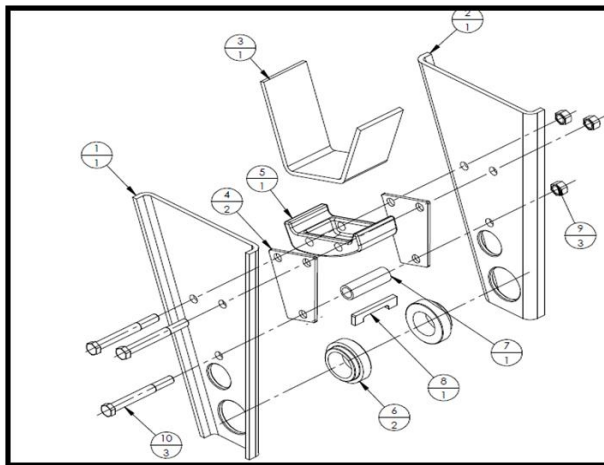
Front Hanger Welding Assembly PD900382
